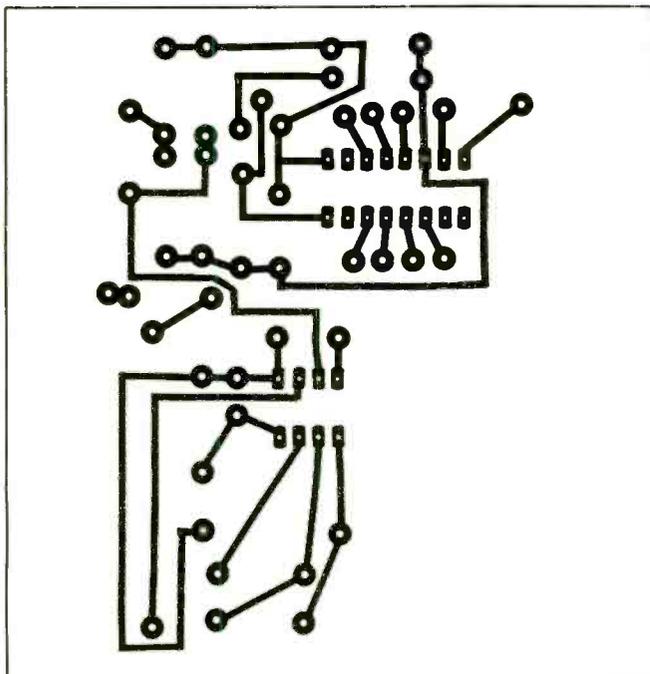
Actual-size etching-and-drilling guide to use for fabricating your own printed-circuit board.
